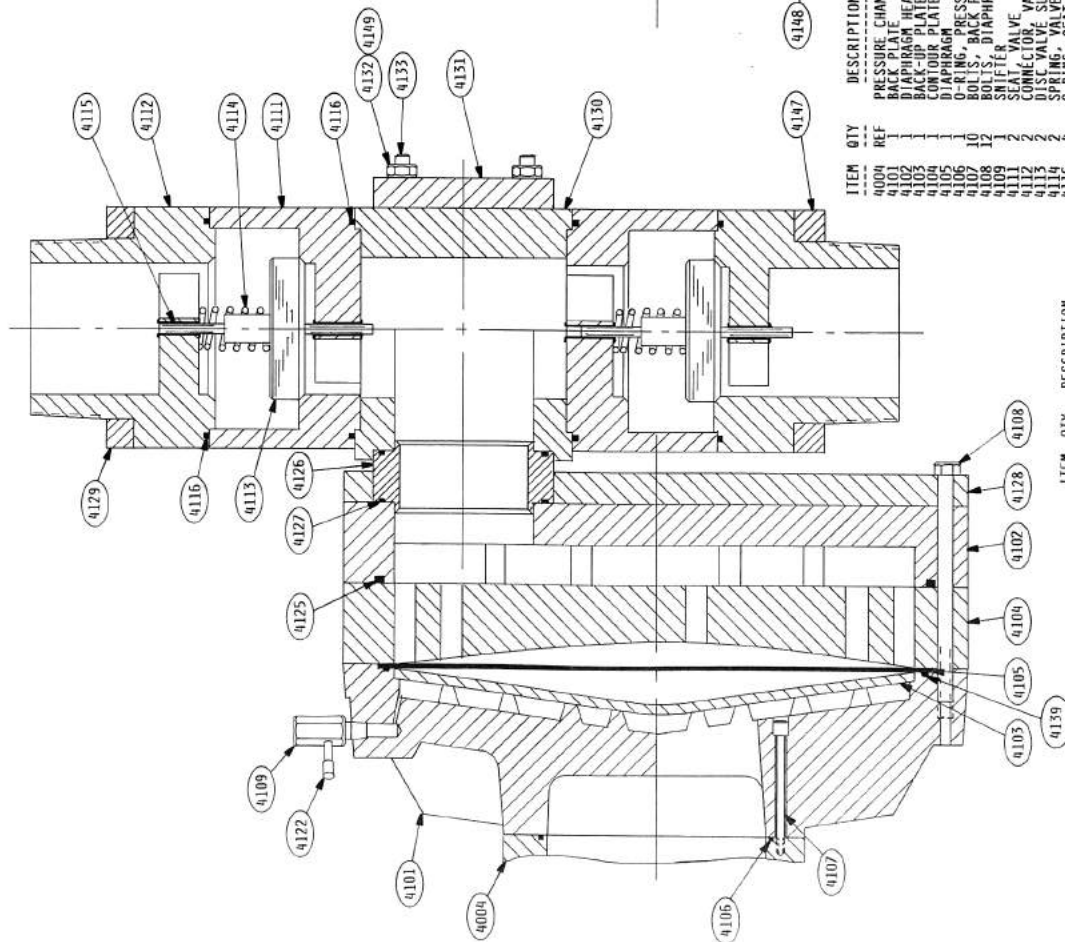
Liquid End - Plastic 3" & 4" Plunger Size w/ Disc Valves
